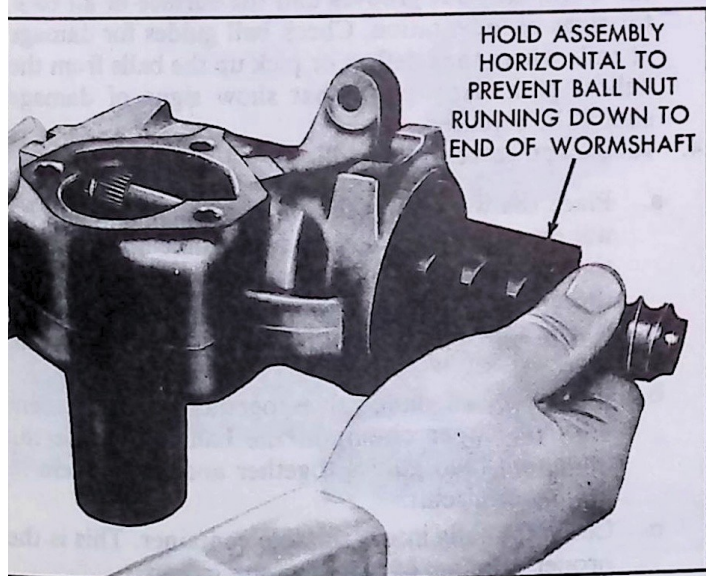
Removing the Wormshaft and Ball Nut—Typical
